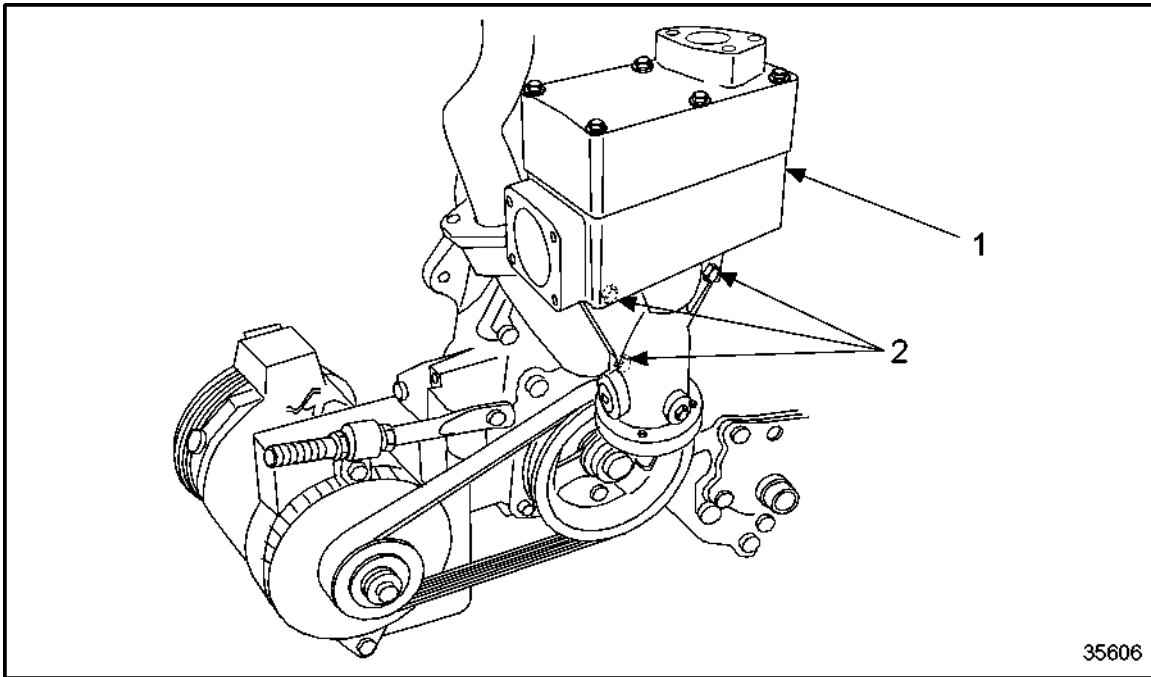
Removing Restrictor, Thermostats with Sealing Rings, O-rings
